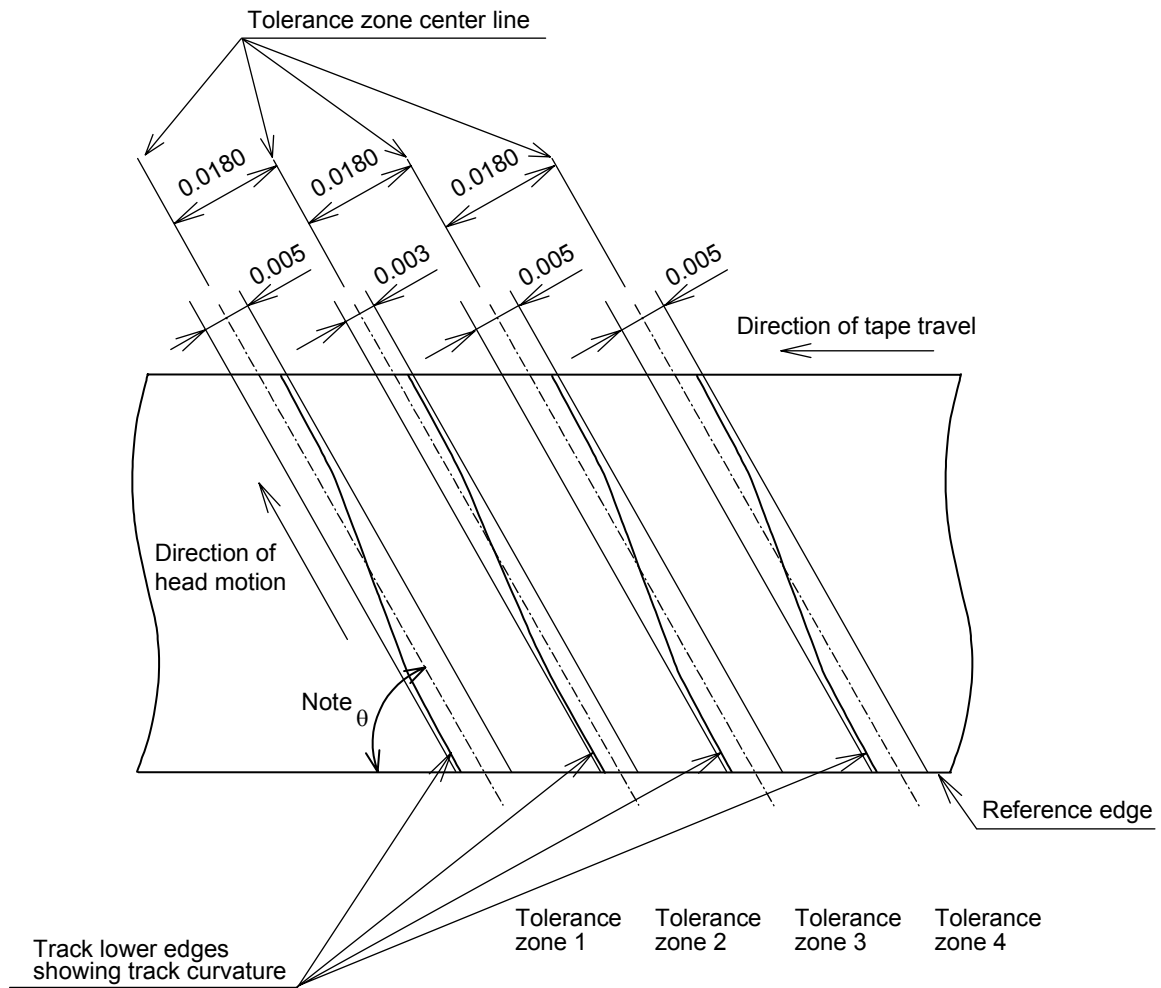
Locations and dimensions of tolerance zones of helical track record of 50 Mb/s format
